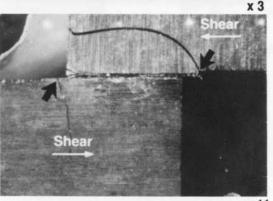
Fracture of brazed K68 cemented carbide plates under shear loading. The sample was produced using MBF-1002 filler metal. Cracks initiate in the fillet area. The same fracture mode is observed in joints brazed with Au-18Ni, Cocuman, etc.
